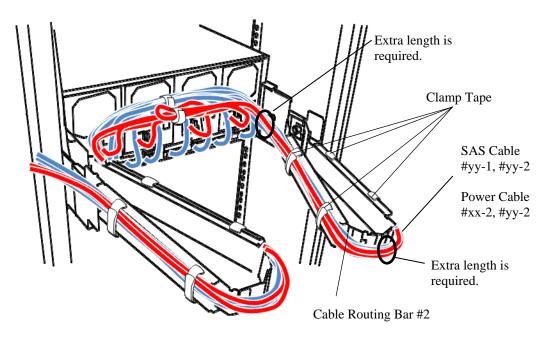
Fixation of SAS Cables (#yy-1, #yy-2) and Power Cables (#xx-2, #yy-2)
